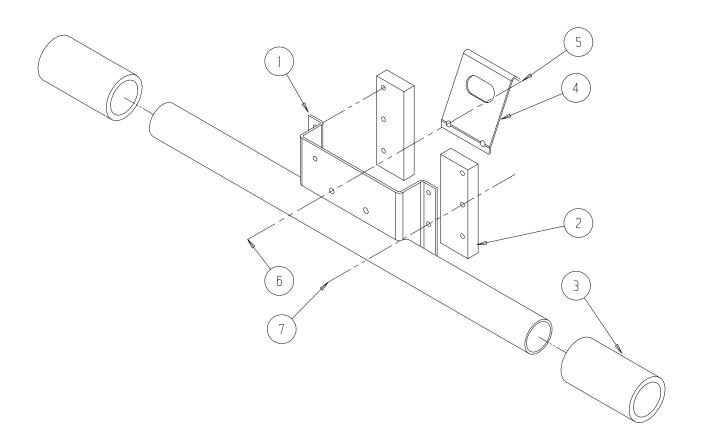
UL25/32/40 loader bar assembly illustration.
